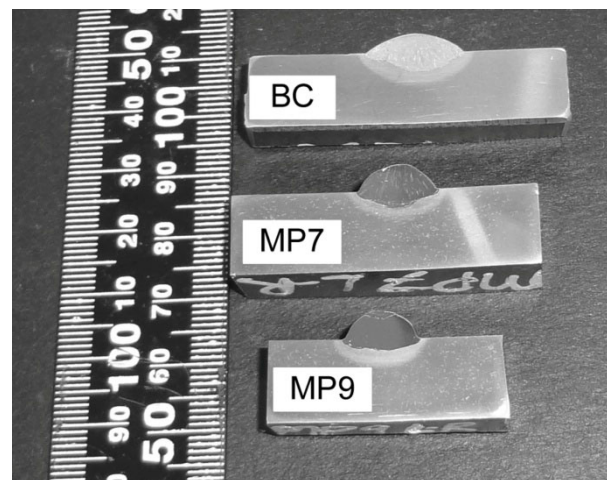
Photograph of BC, MP7 and MP9 weld metal cross-sections.
